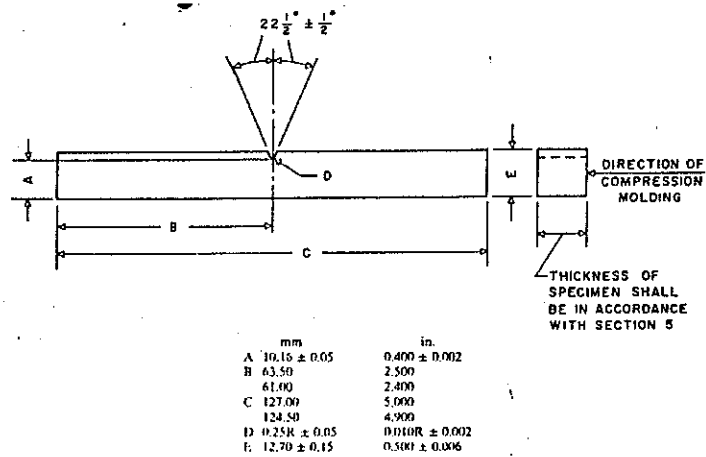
Dimensions of Simple Beam, Charpy Type, Impact Test Specimen
